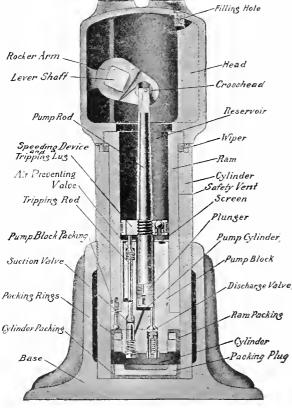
Inside Type Hydraulic Jack. Joyce-Cridland Co.
